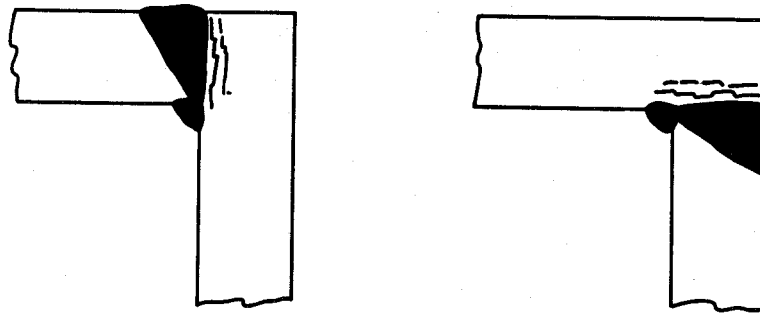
CORNER OR FLANGE TO ROLL UP JOINT
